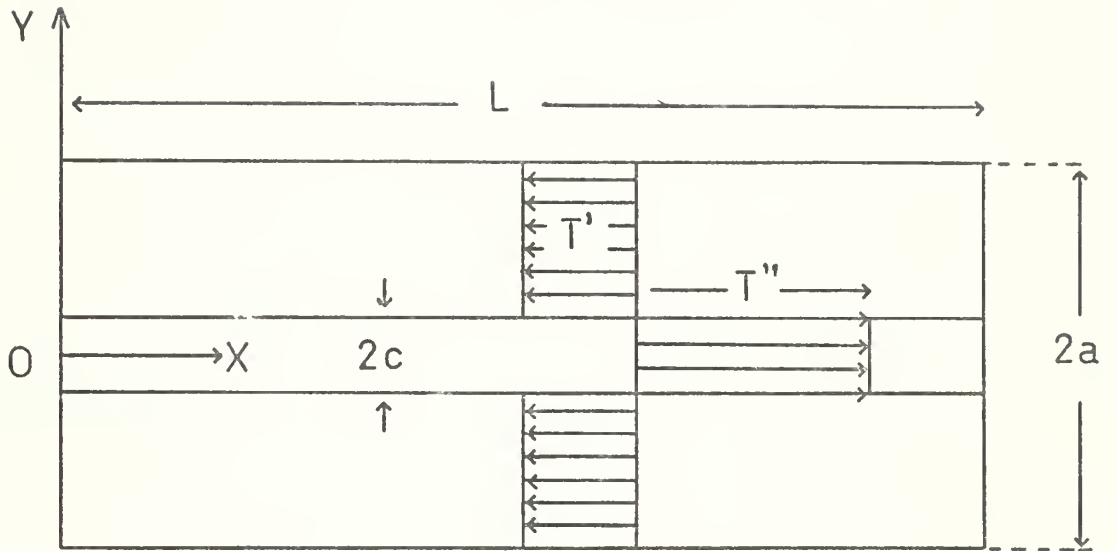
RESIDUAL STRESS IN A LONG WELDED STRIP.
